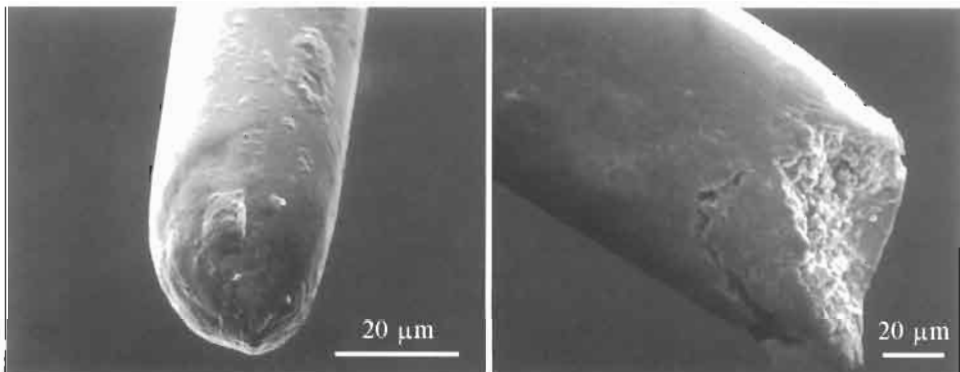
Fracture surfaces of as-drawn Cu wires. Left: in the low-fatigue domain necking formed a cone-like fracture surface in this 30 μ m diameter wire when it failed after 980 cycles with a max. stress of 300 MPa. Right: after some necking a crack moved through the remaining cross-section. Failure occurred after 2.77×10^5 cycles at 160 MPa. Diameter 95 μ m.
